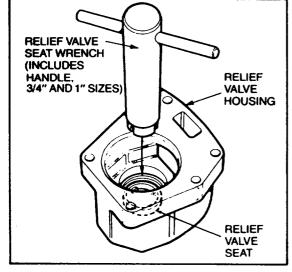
A. RELIEF VALVE SEAT REPLACEMENT FRP-I
